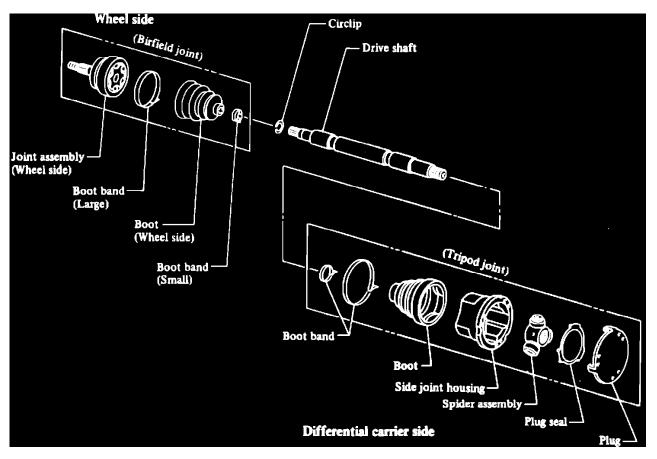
Driveshaft exploded view. Pathfinder & 4WD Pickup
